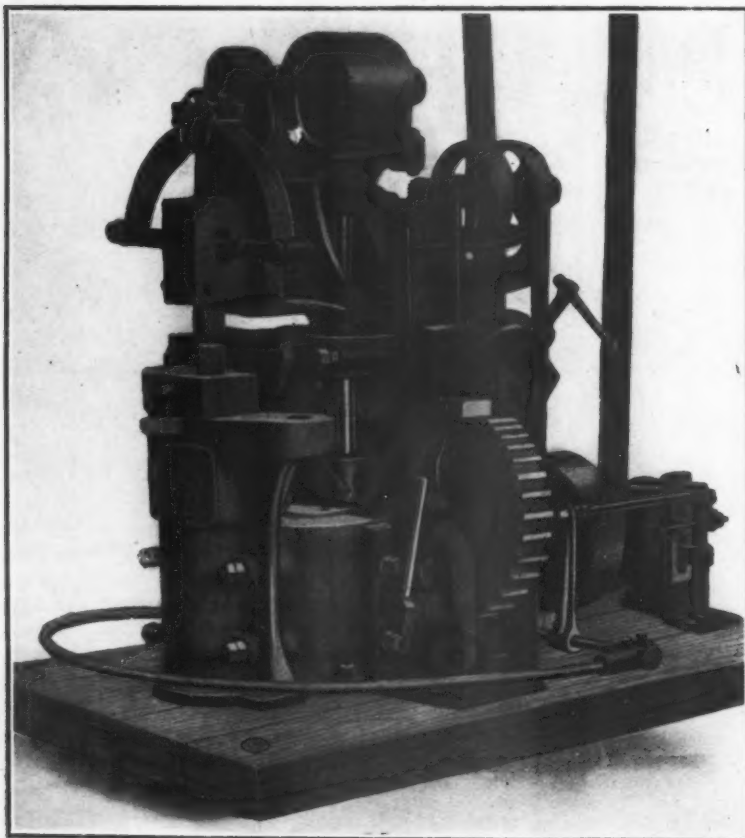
Right Side View of a 75-lb. Radial Power Hammer, Showing the Circular Swage Block and Bending Clamp.
